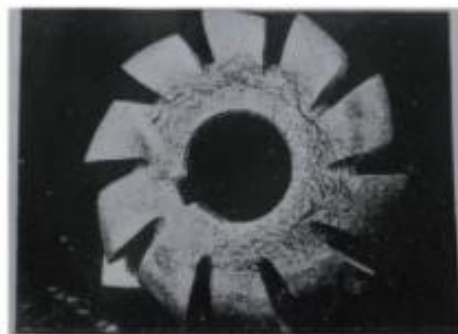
Cracks of slotting cutter material due to porosity during heat treatment [16].
